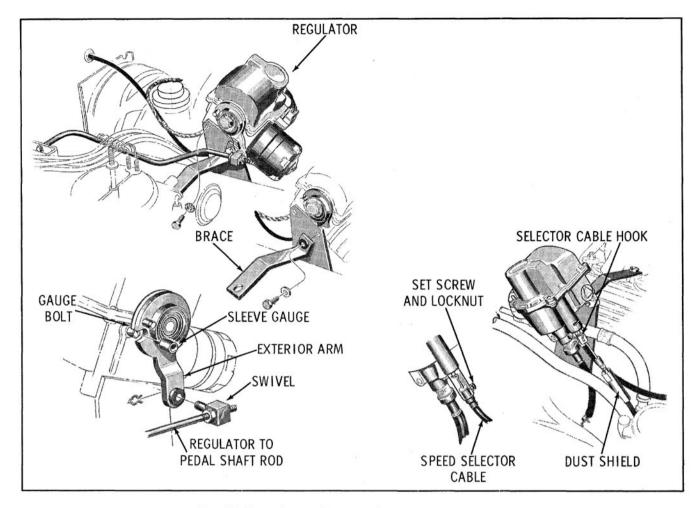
Linkage Adjustment (33, 34, 35, 36, 38 & 39)
